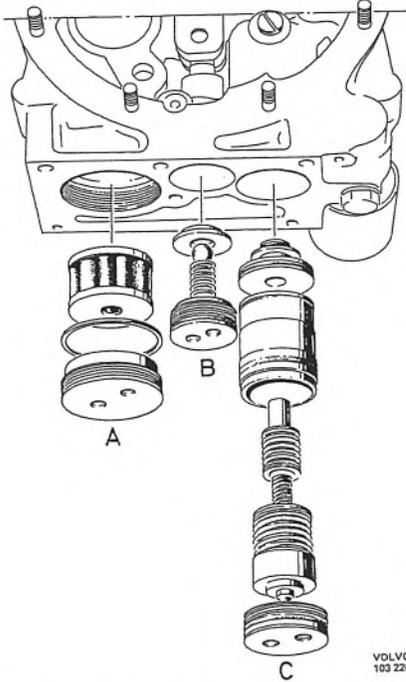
Installing fine filter, oil pump check valve and relief valve
